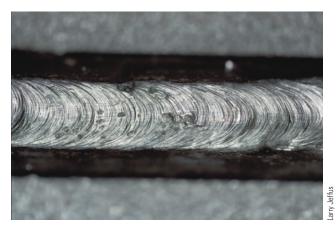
Weld bead made with GMAW globular metal transfer mode.
